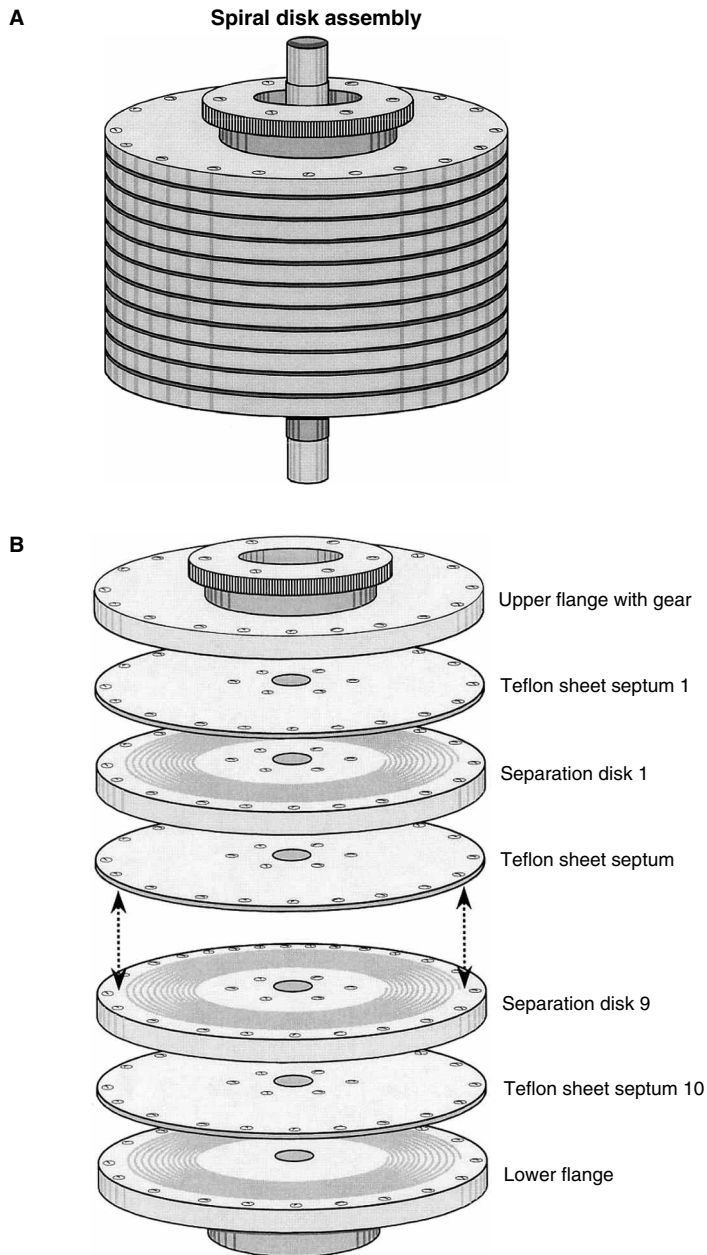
Schematic illustration of the spiral disk assembly. A, Whole view and B, exploded view showing each component.
